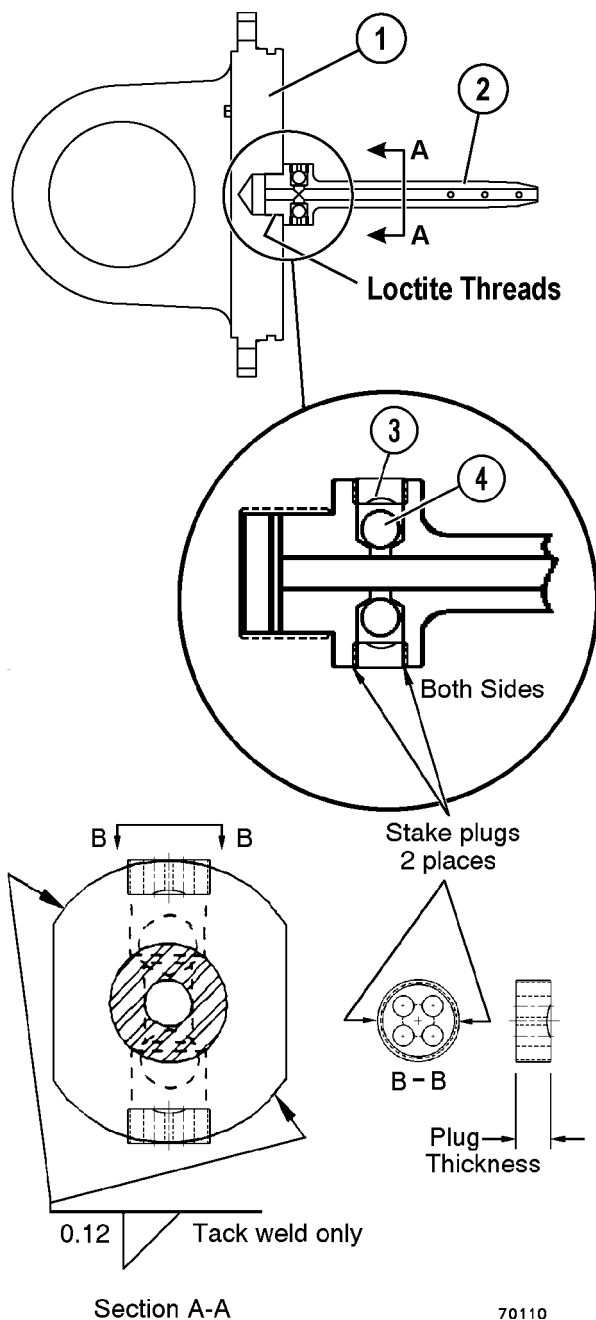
QUILL ASSEMBLY INSTALLATION
